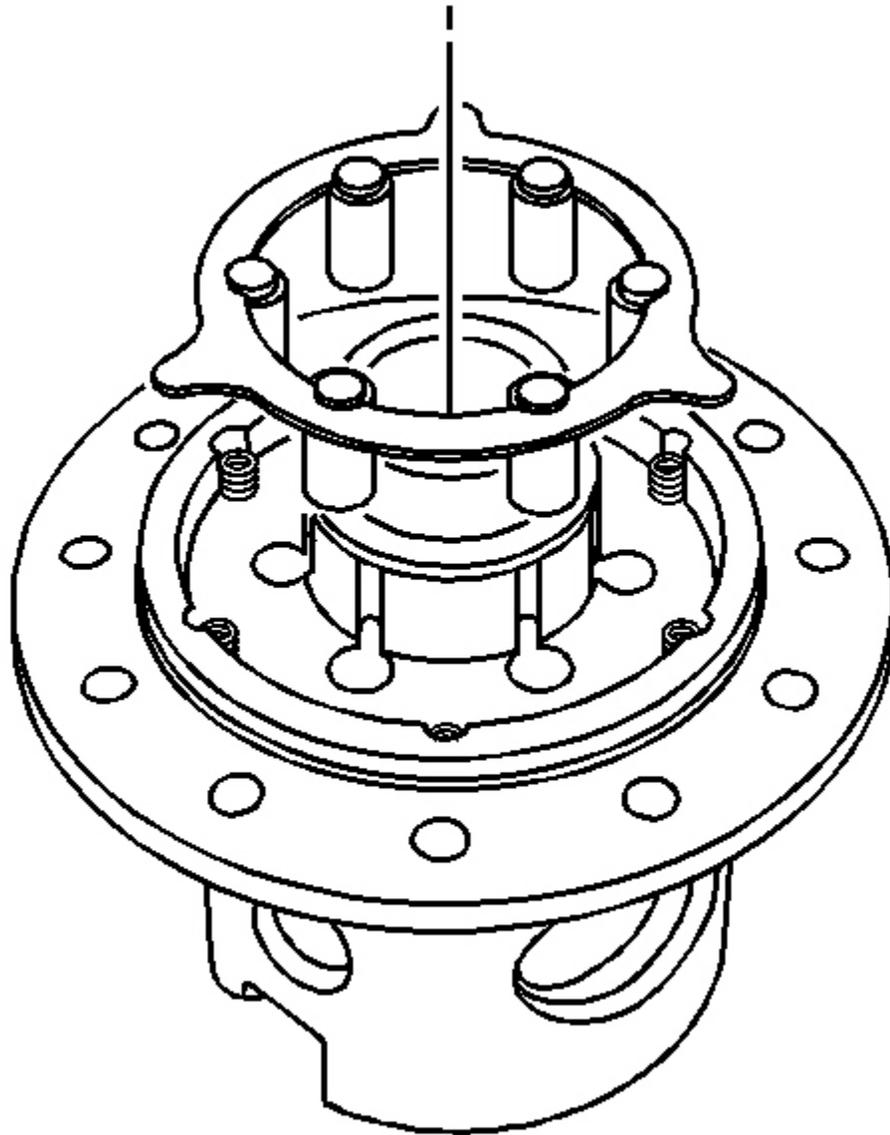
Locking Differential Clutch Spring Retainer & Differential Carrier Lock Pins
